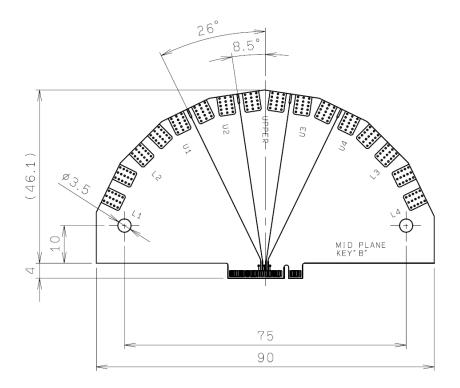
Mid-Plane Module Test Fixture PCB Layout
